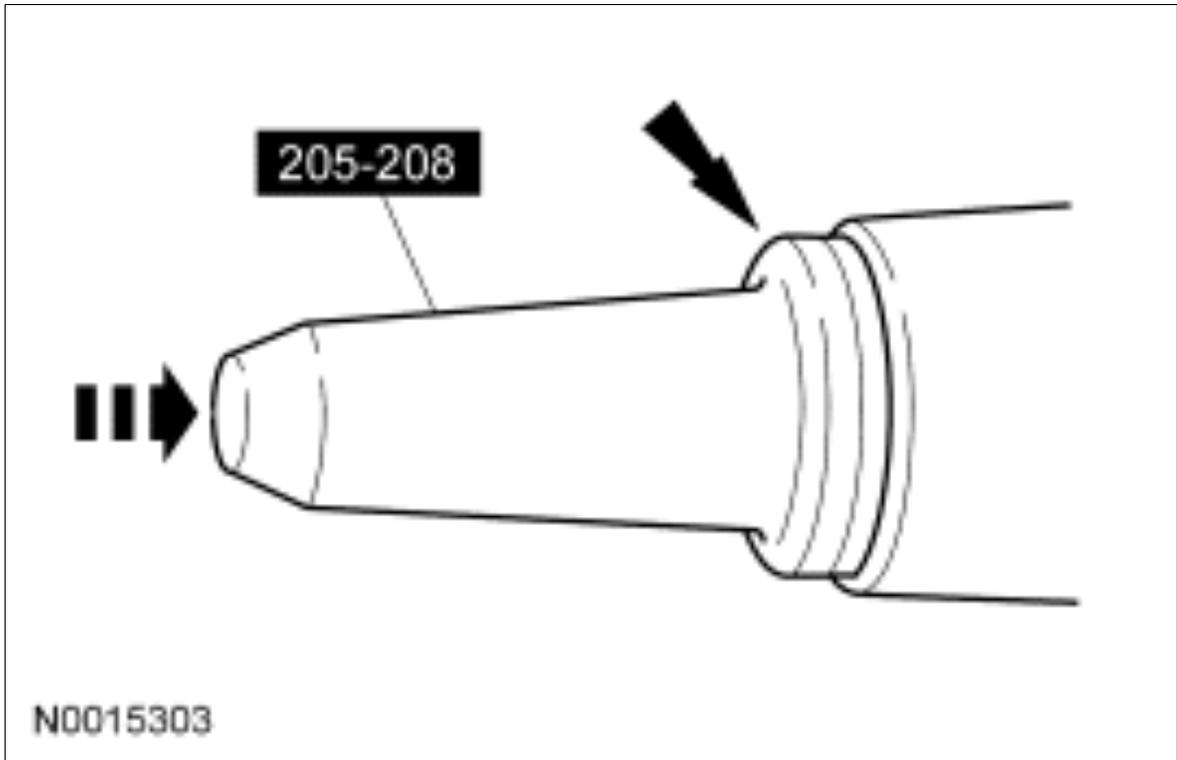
Installing Drive Pinion Assembly Into Axle Housing
